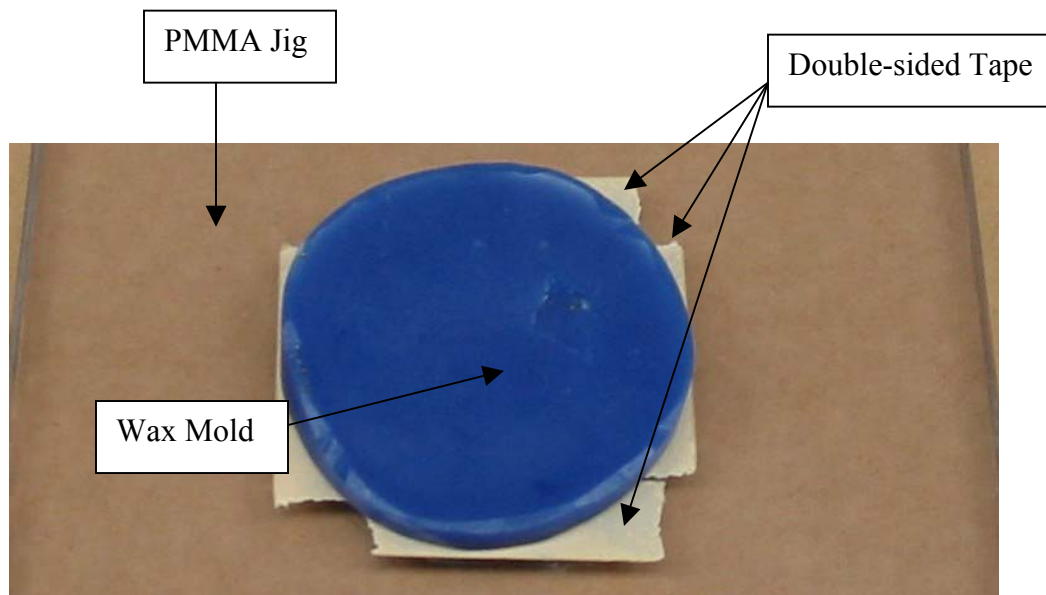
Top View of Wax Mold Taped to PMMA Surface
